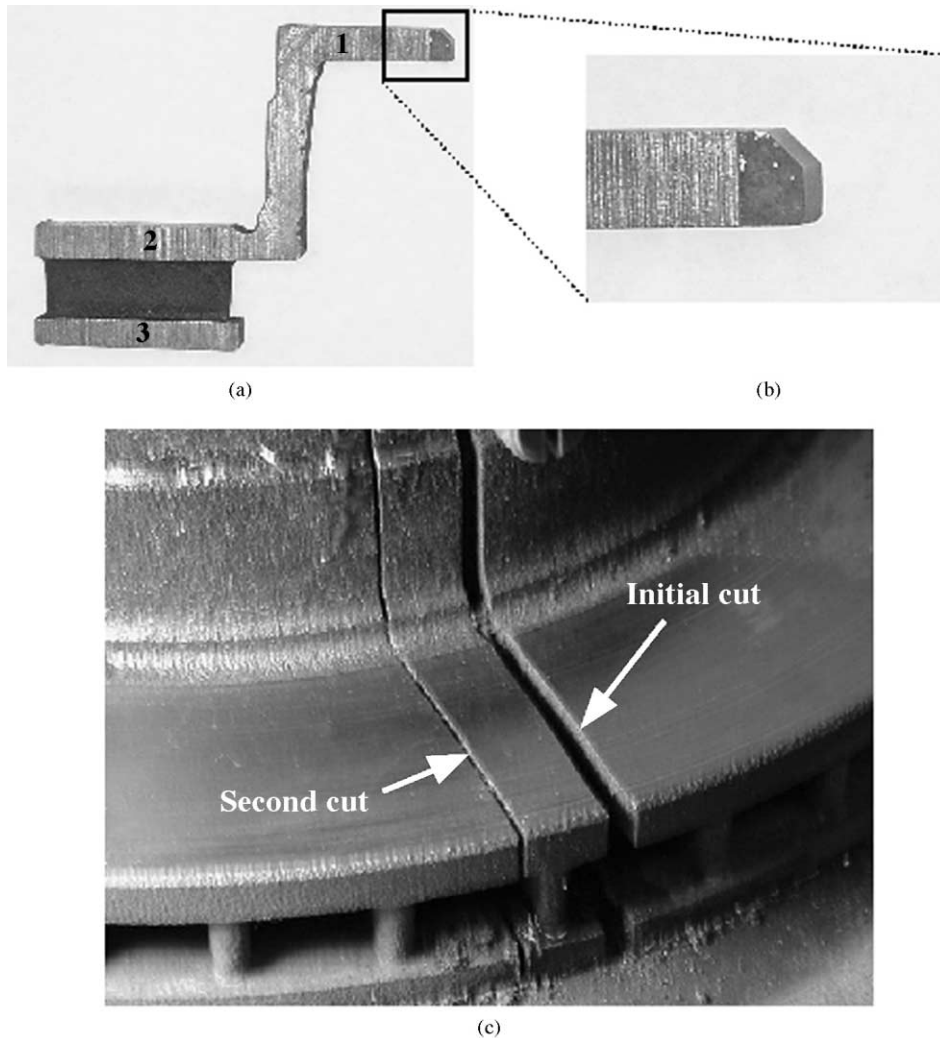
Views of the Ford F-250 disc brake: (a) cross-section of the brake; (b) close-up of a fracture that occurred while machining the sample section; (c) comparison of the first and second cuts used to remove the cross-section shows considerable stress relief during machining.
